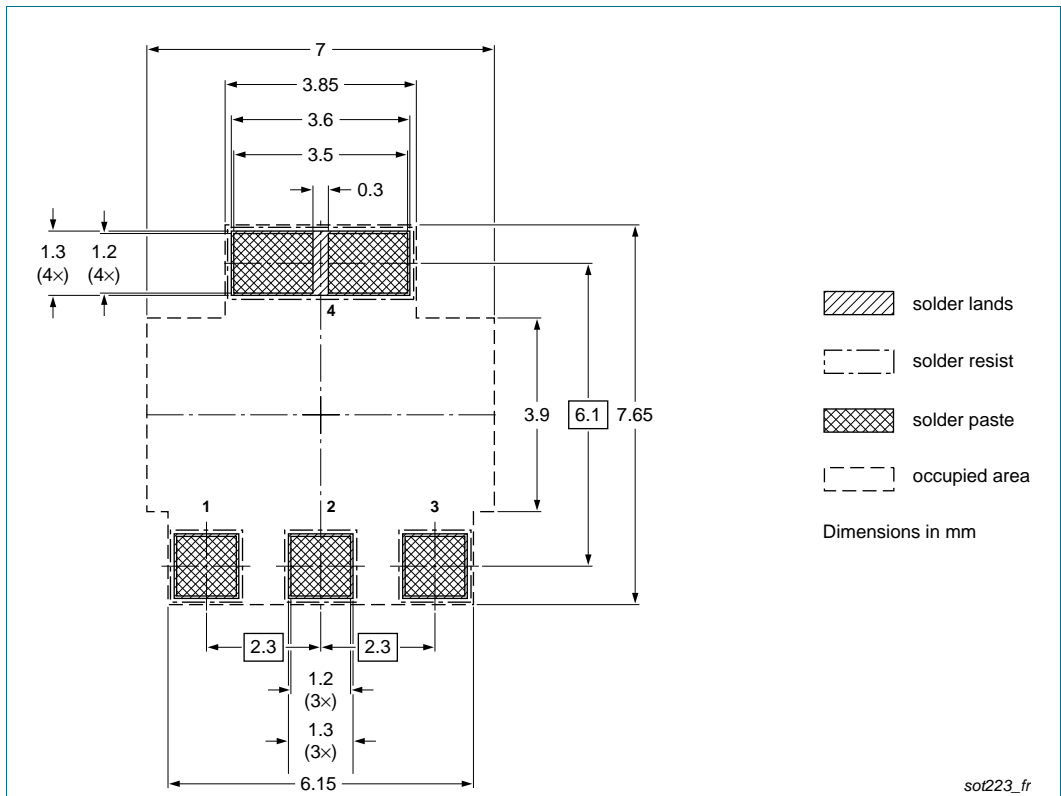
Reflow soldering footprint SOT223 (SC-73)
